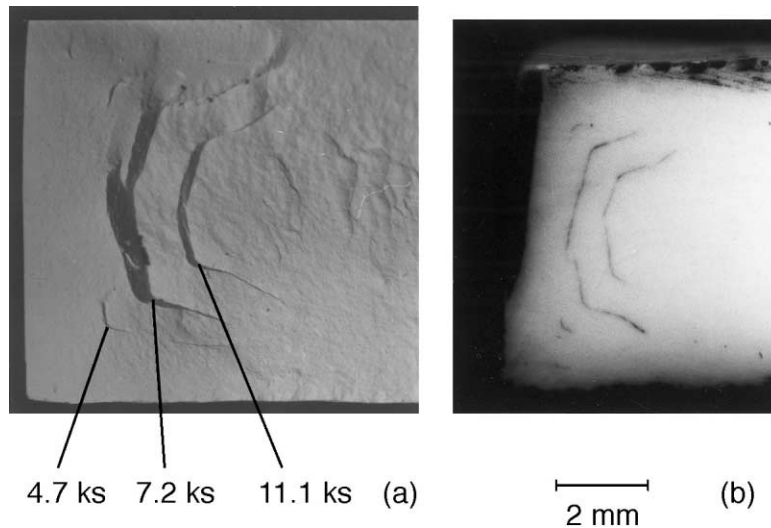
Defects in 10×20×20 mm thick samples cut from insulated sprue mouldings: (a) fractured after binder removal; (b) sintered and polished surface.
